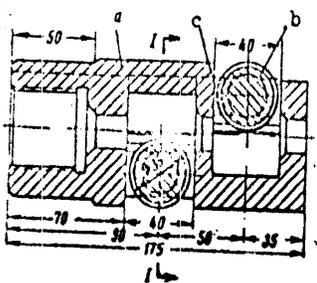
Arrangement of rolls in a separator with two roll sets: a - separator; b - roll; c - spacer.
